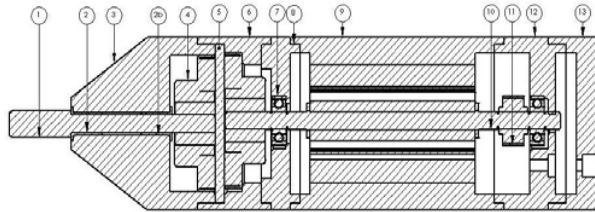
Sketch of underwater electric motor. 1-propeller shaft, 2- Flange bearing, 3- Bullet housing, 4-Magnetic Coupling, 5-Magnet separator, 6-Magnetic coupling housing, 7- Bearing housing, 8- Bearing housing, 9-Stator housing, 10-Rotor, 12-Rear bearing housing, 13- Sensor cap.
